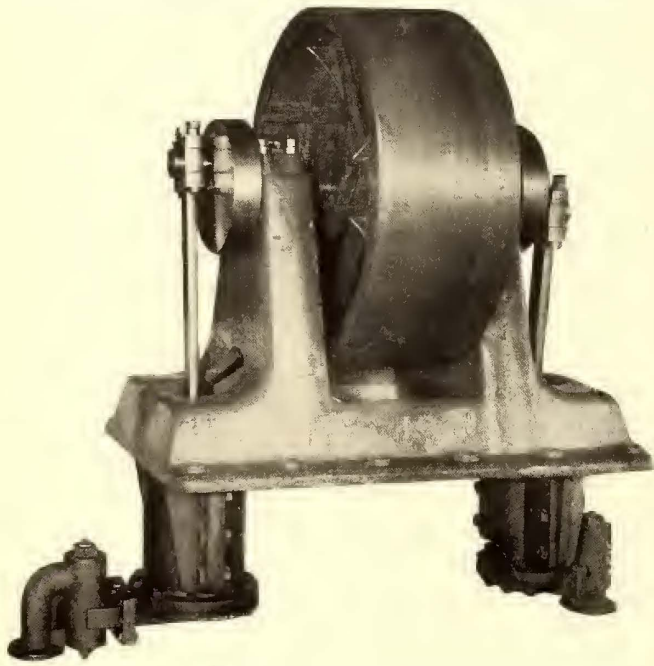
NEW COMPRESSOR FOR AIR-STORAGE SYSTEM
